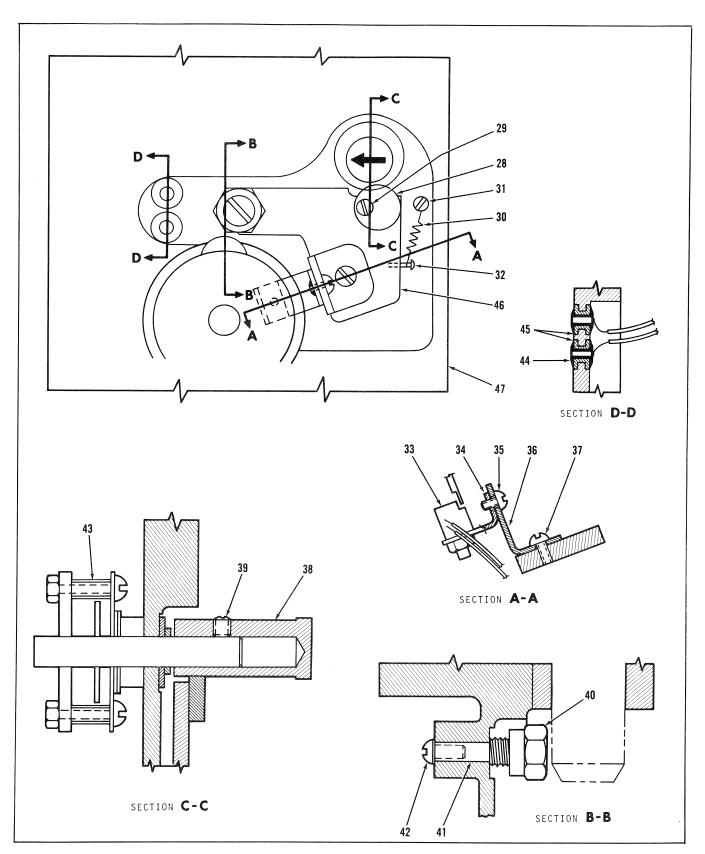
Optical and Magnetic Sound Head Assembly (Sheet 2 of 2 showing components applicable to Model LVRM)
